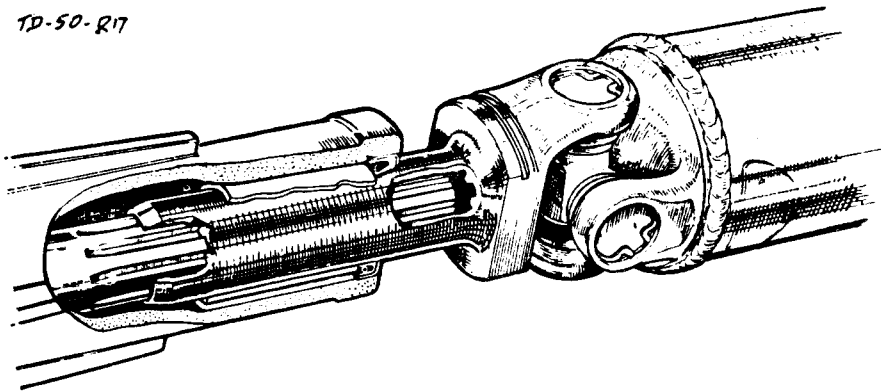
SLIDING SPLINES & FRONT UNIVERSAL
